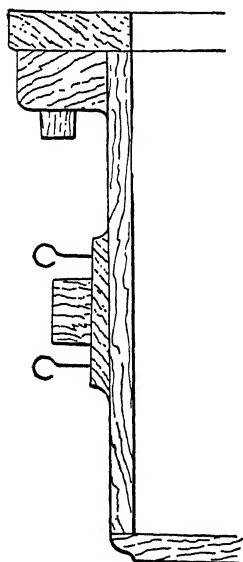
Shows Loose Boss and Print on end of Engine Bed.
